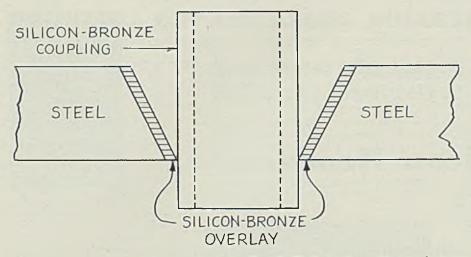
Method of welding a bronze coupling, collar or outlet to a steel tank or other fabrication
